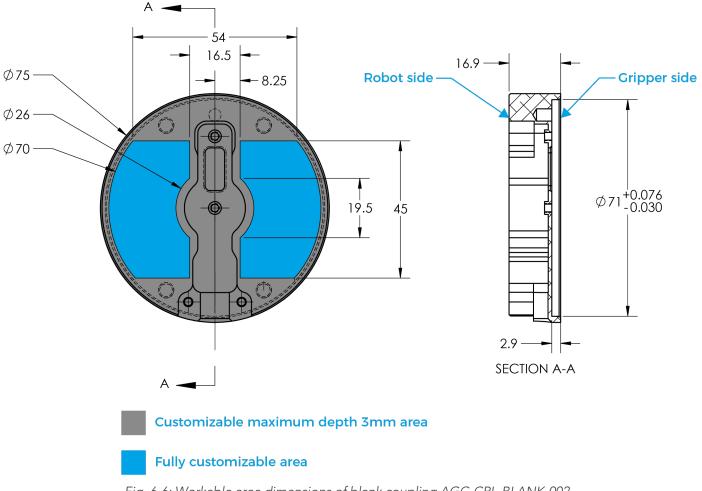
Workable area dimensions of blank coupling AGC-CPL-BLANK-002
